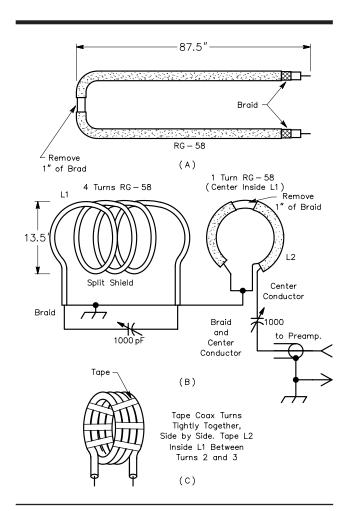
Components and assembly details of the shielded loop shown in Fig 14.
